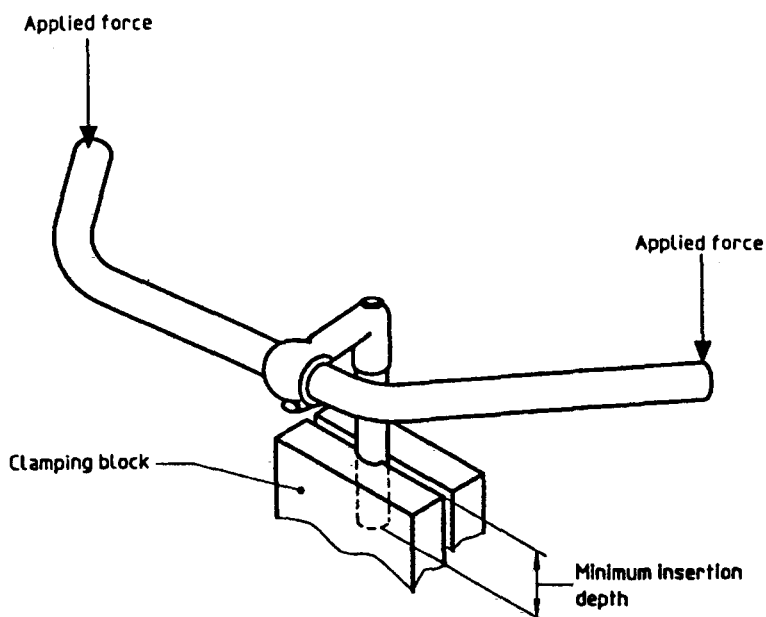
TORQUE TEST ON HANDLE BAR STEM ASSEMBLY
